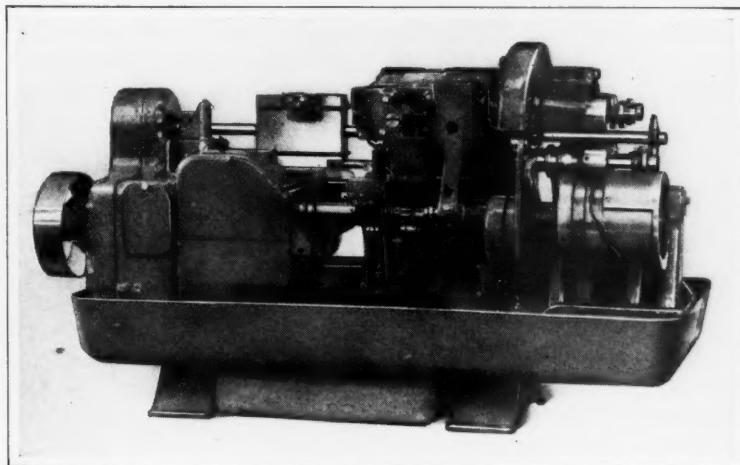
Rear View of Automatic Screw Machine Equipped with Single-pulley Belt Drive
